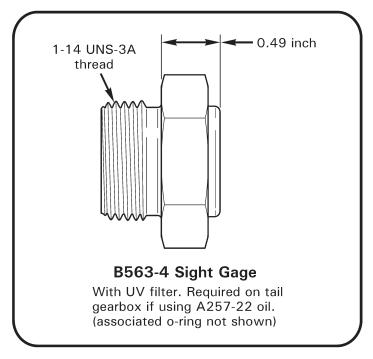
A TAIL GEARBOX SIGHT GAGE AND GEAR OIL
